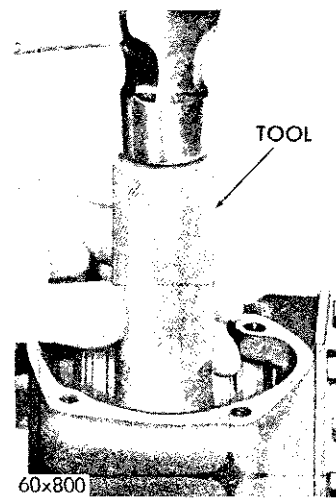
Installing Gear Shaft Housing Inner Bearing
